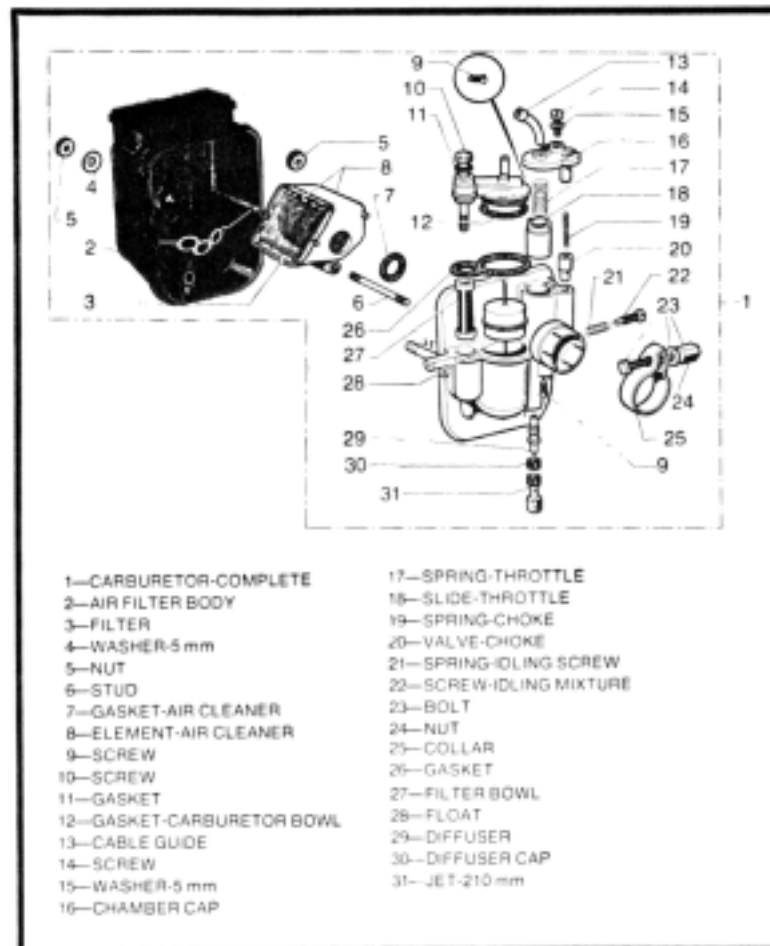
The Motobecane carburetor, developed specifically for moped service.
